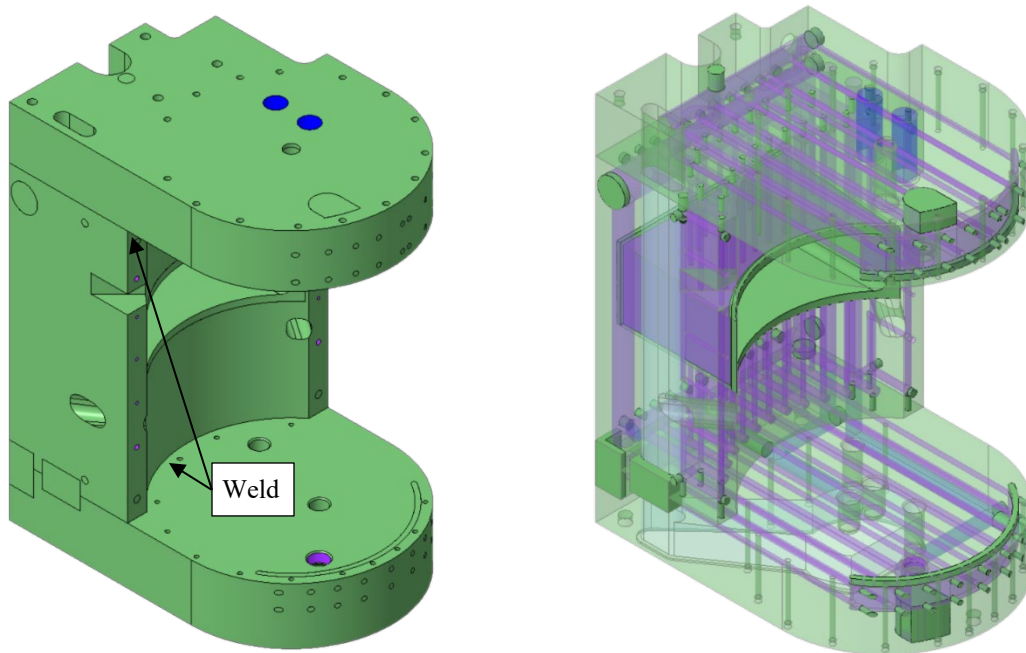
Backbone assembly after welding of lower, middle, and upper backbone.
